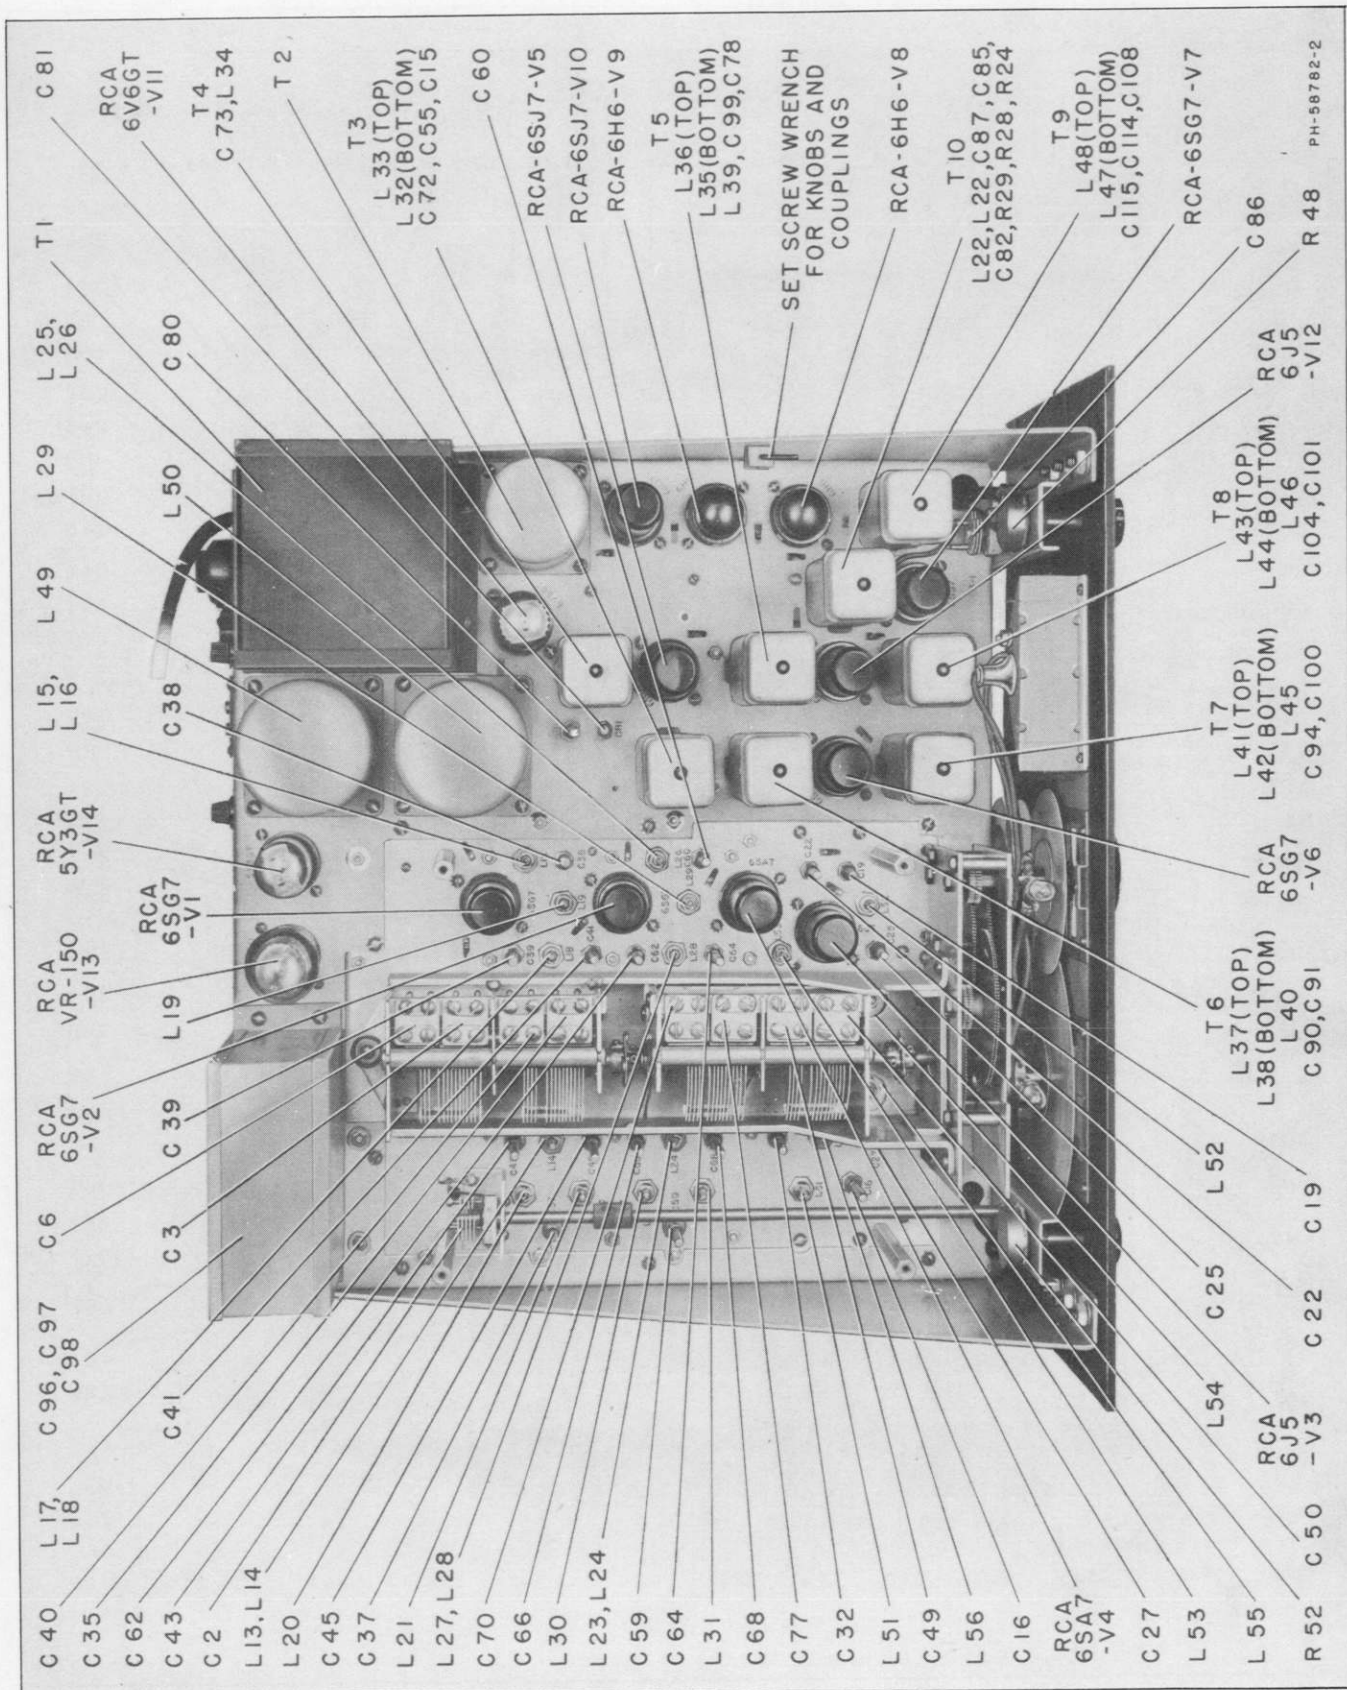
Radio Receiver, Navy Type CRV-46246-B—Chassis Top View, Covers Removed
